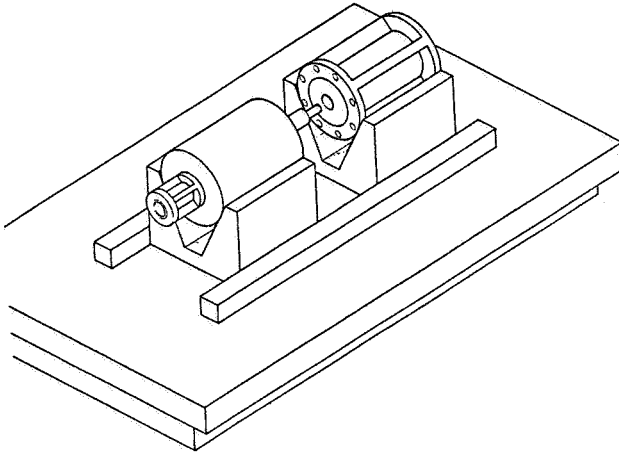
Schematic of compressor subassembly during assembly procedure.
